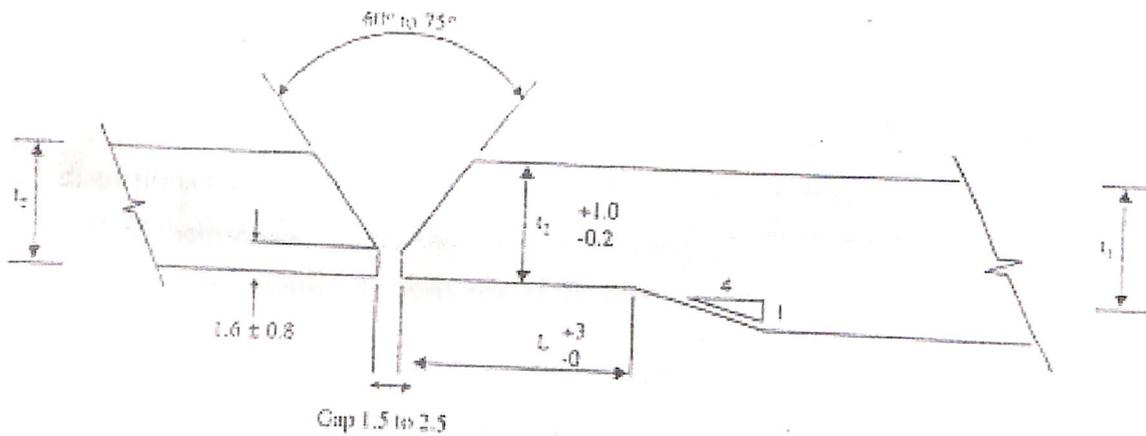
Counterbore and taper joint design for transition welds joining pipe of unequal wall thickness. Tolerances in mm.
